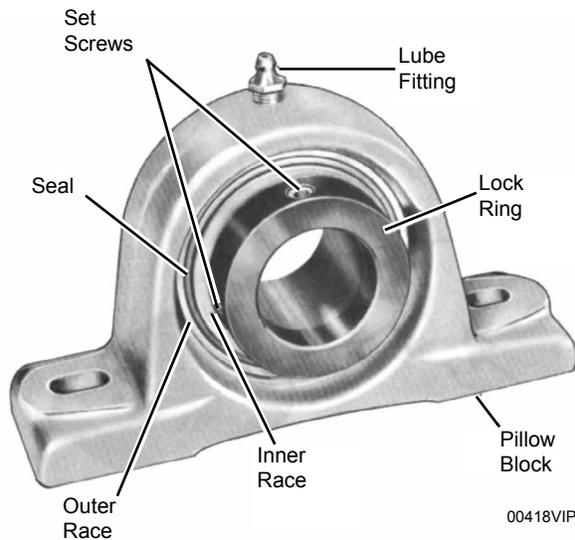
BEARING WITH SETSCREW TYPE LOCKING DEVICE
